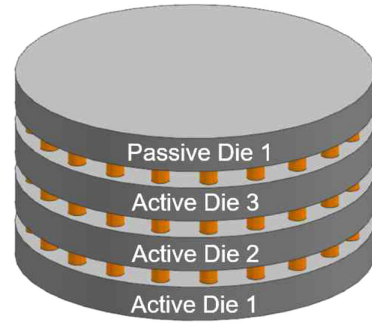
Schematic drawing of passive chip stacking in 3D structure
